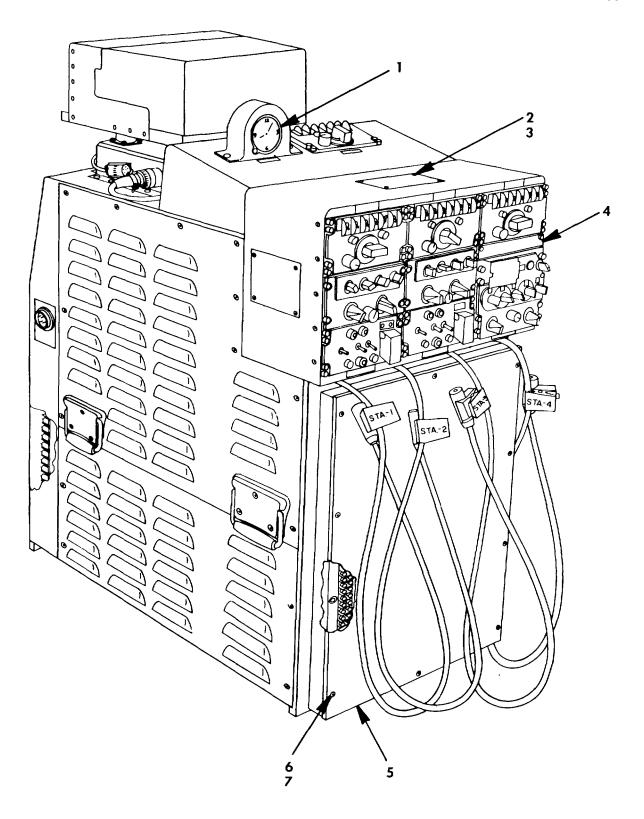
FRAME ASSEMBLY (V)1 & 2 (SHEET 1 OF 4) 11
